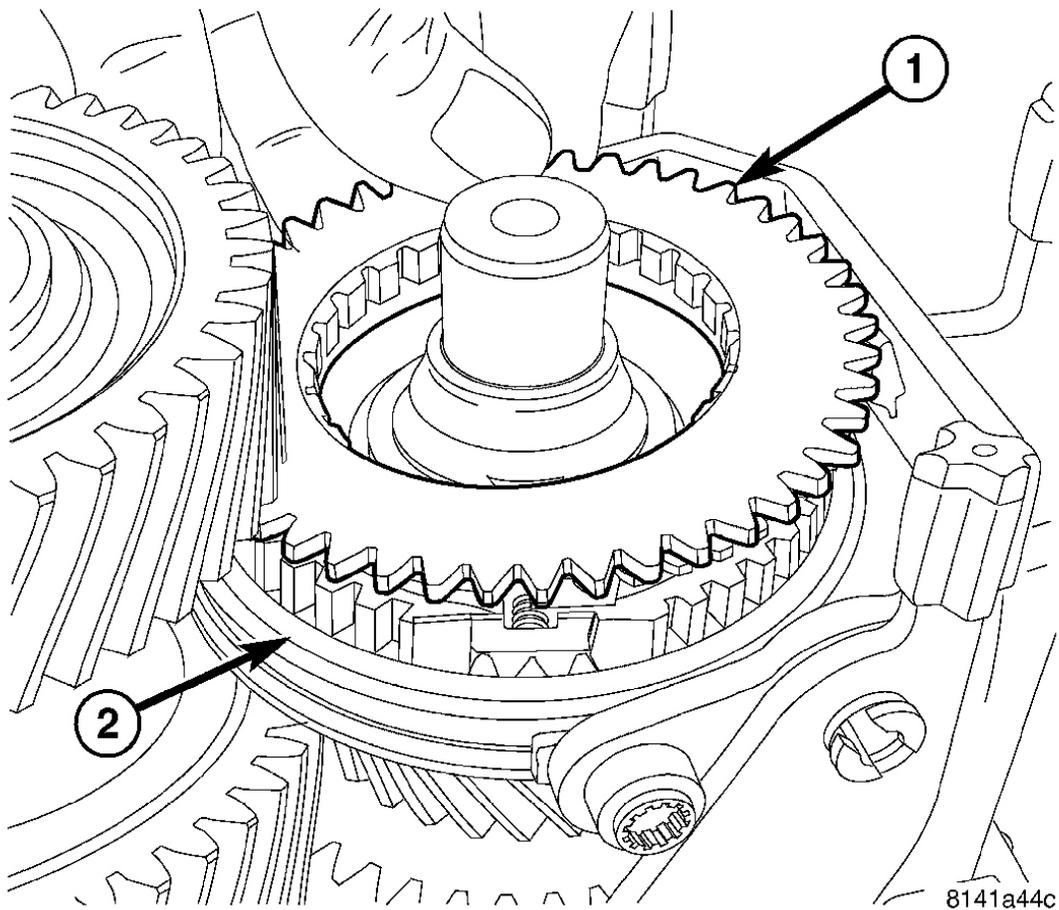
Identifying Fifth Gear Synchronizer Blocker Ring & 5-6 Synchronizer Hub
